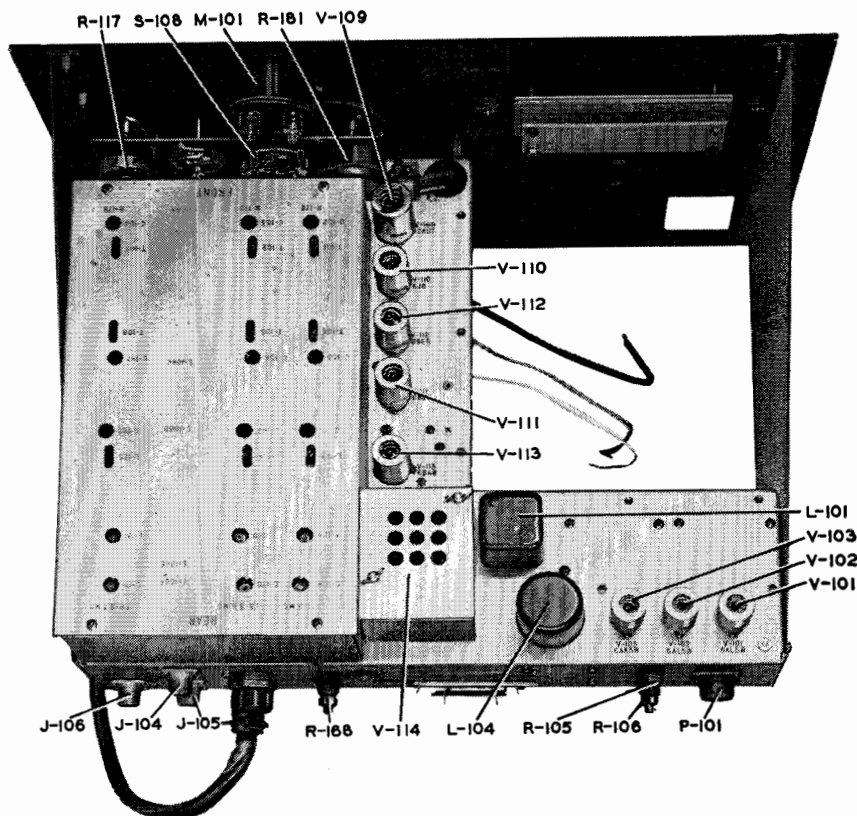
Keyer KY-30/GRT Parts Arrangement, R-F Compartment - Top View
